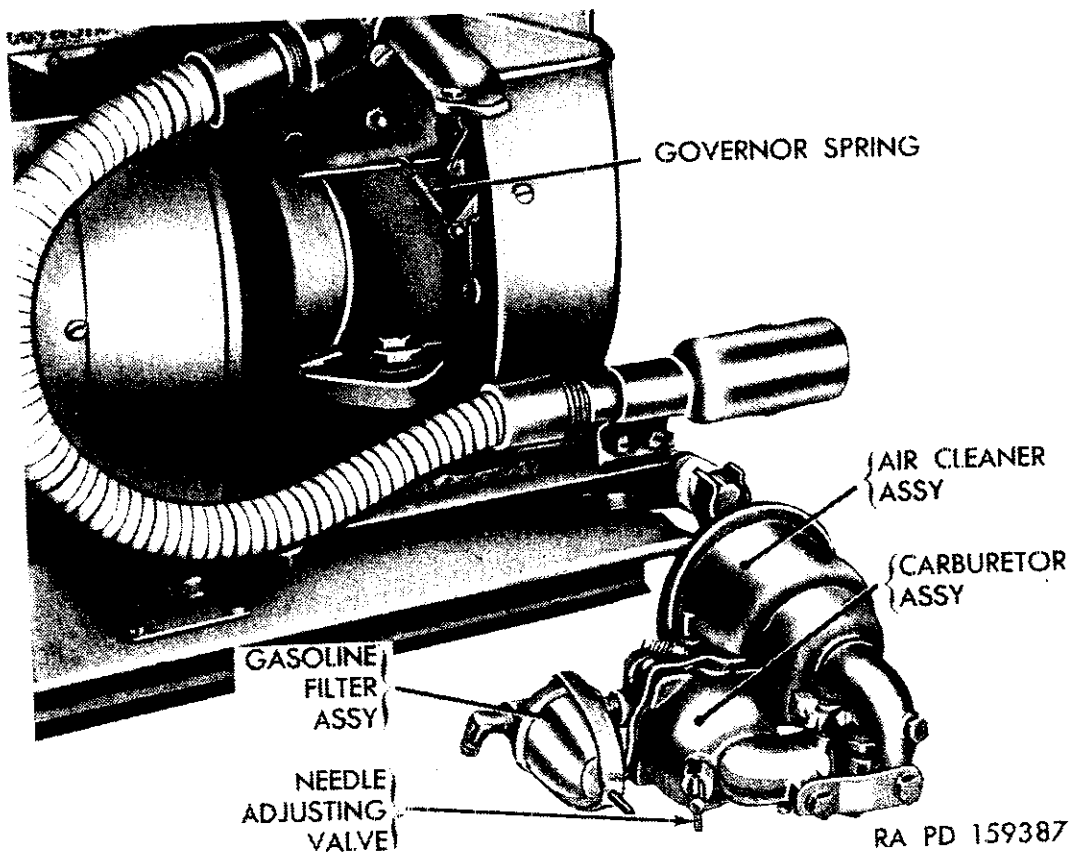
Power charger—governor spring (carburetor, gas filter, and air cleaner removed).
